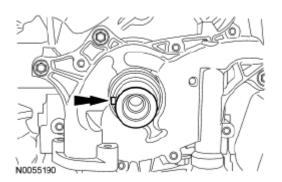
Locating M6 Bolt Courtesy of FORD MOTOR CO.
